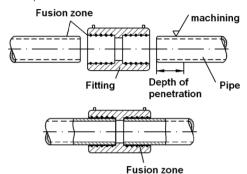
Electro-socket welding of a coupler (principle).
